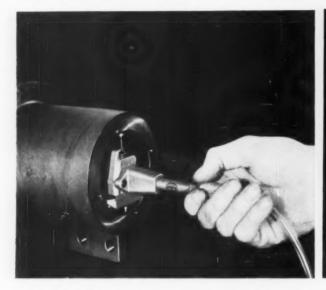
Balljet adjustable spindle kit with gaging anvils
